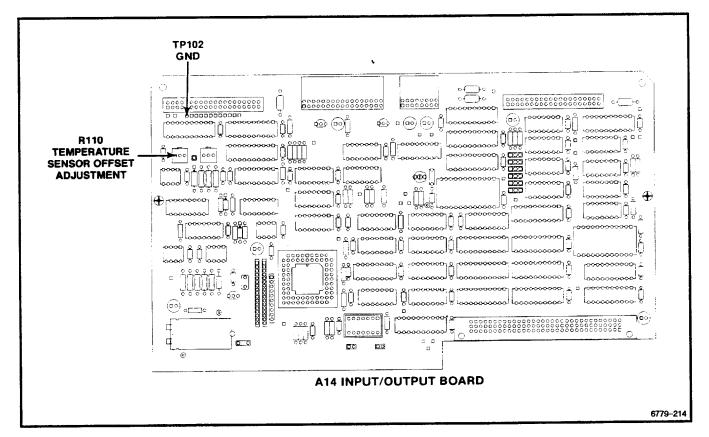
A14 I/O board (Temperature Sensor) test point and adjustment locations.
